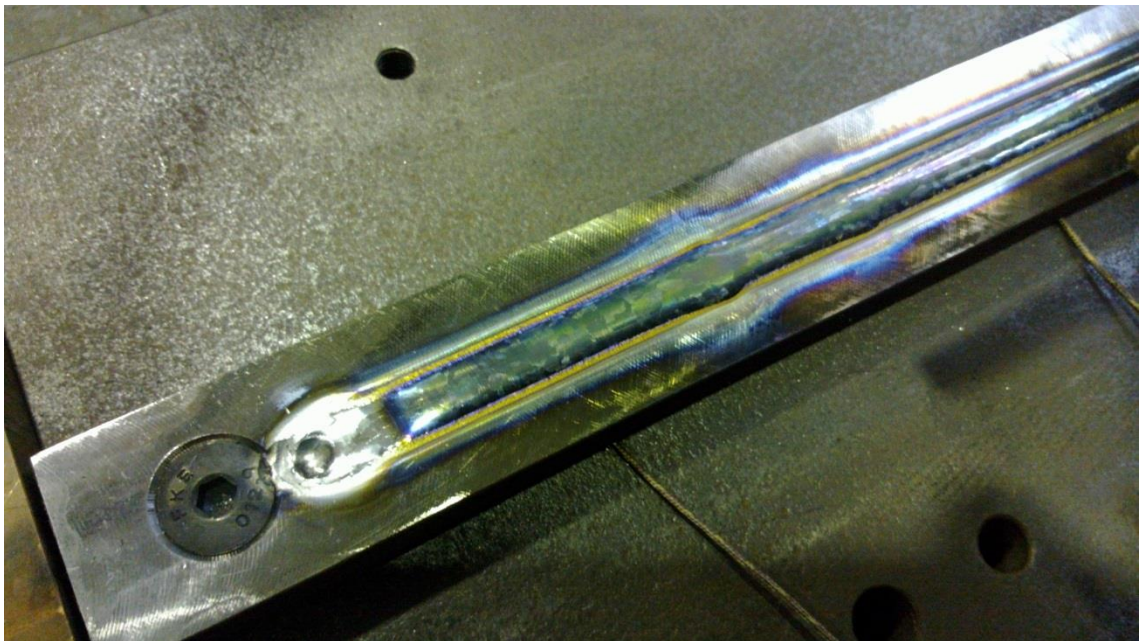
Photograph of weld bead appearance for bead-on-plate trial D (multi-pass without trailing shielding) after the first welding pass showing straw and blue bead appearance with large prior  $\beta$ -Ti grains in the fusion zone and reinforcement and accompanying crater at the end of the weld bead.
